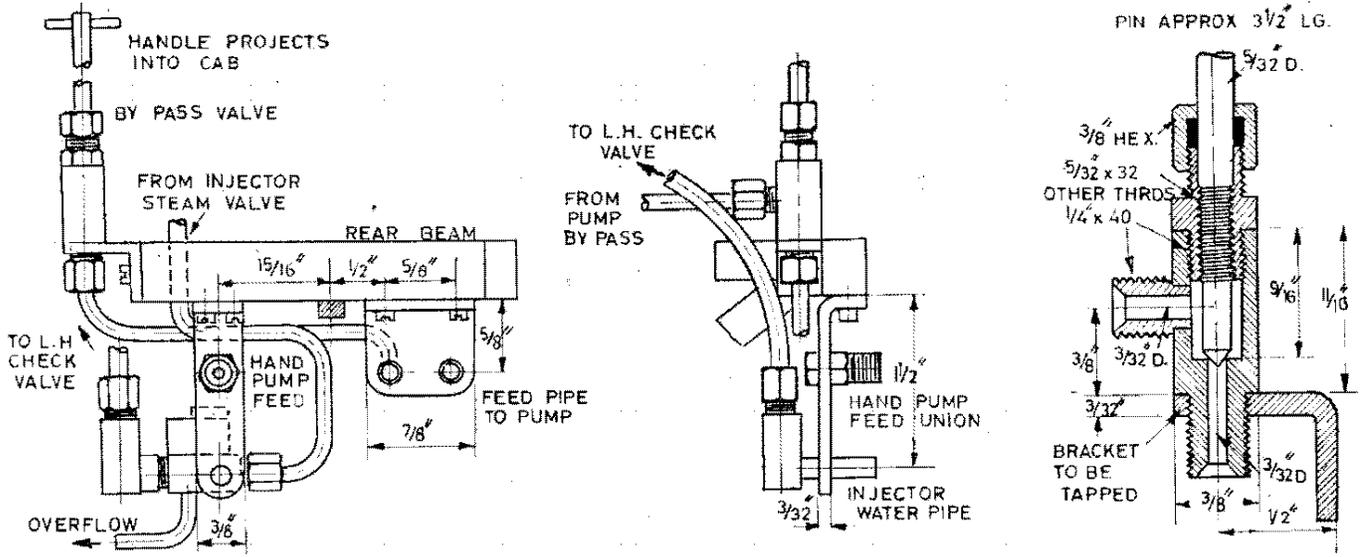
Side view of pipe arrangement for the injector to the left hand check valve on the boiler.
